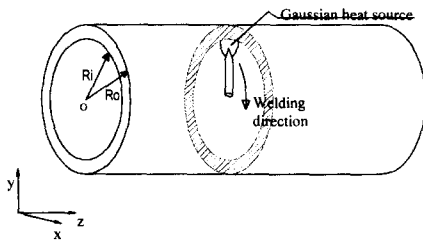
Schematic diagram of GTA pipe inside girth welding
